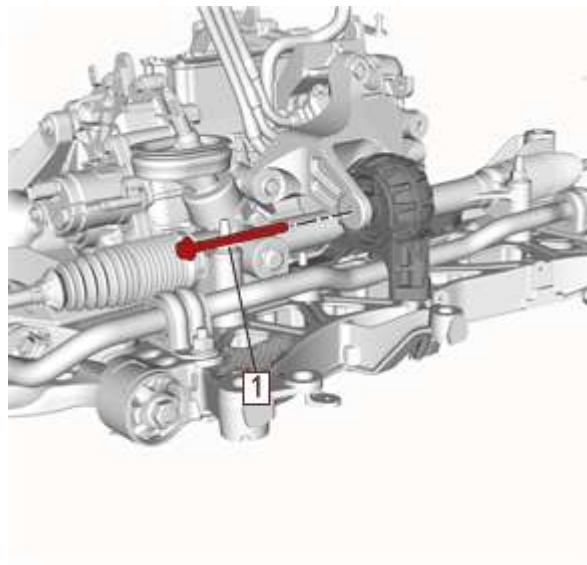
Drive Motor Rear Mount Drive Motor Side Bolt
